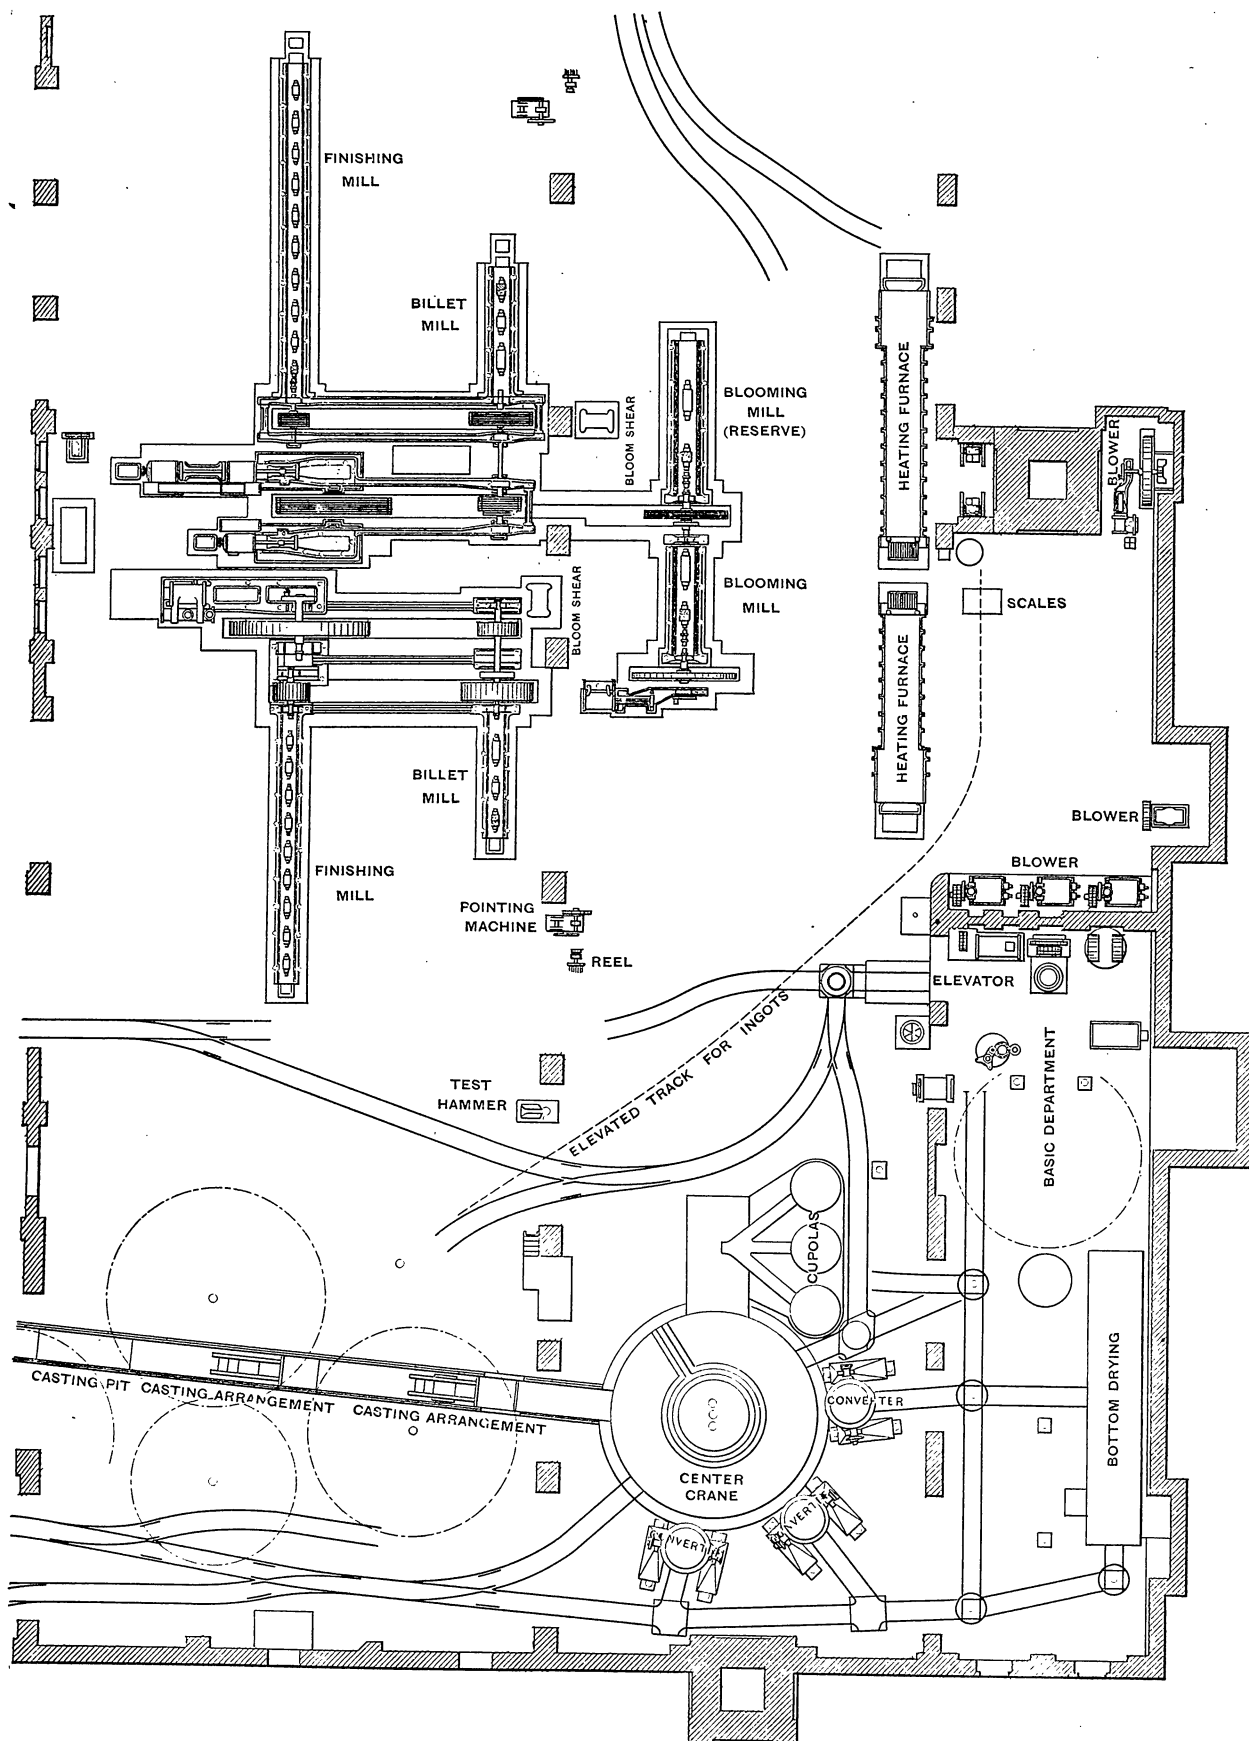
Plan of the Haspe Basic Steel Works and Wire Rod Mill.
